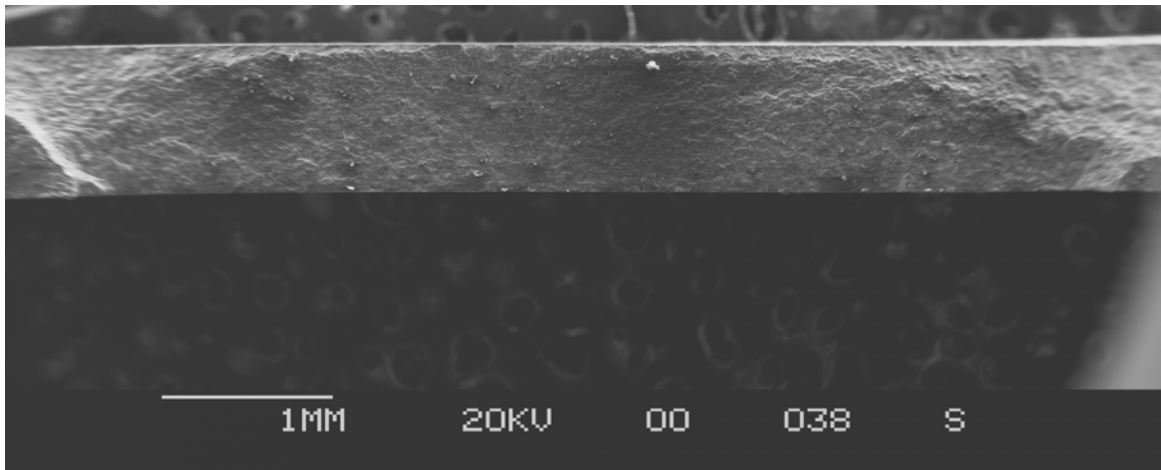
Primary Fatigue Crack on Fracture Surface of Specimen 5878.
